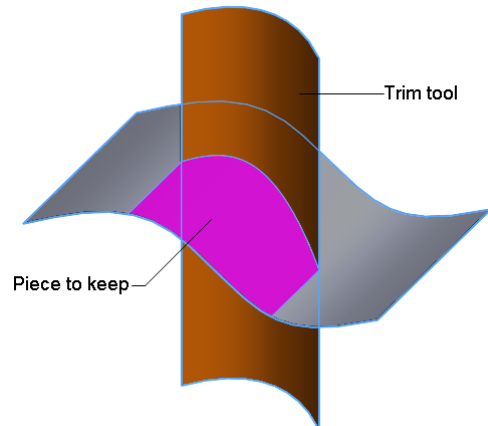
Piece to keep when the Linear radio button is selected
